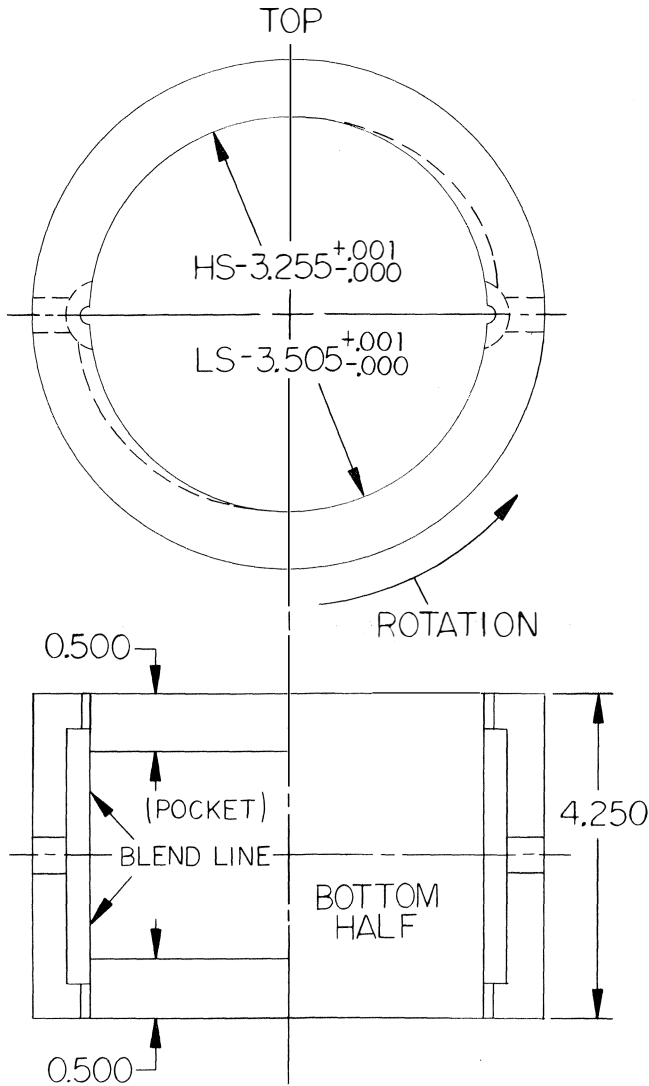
Redesign Double-Pocket Gearbox Bearings.
